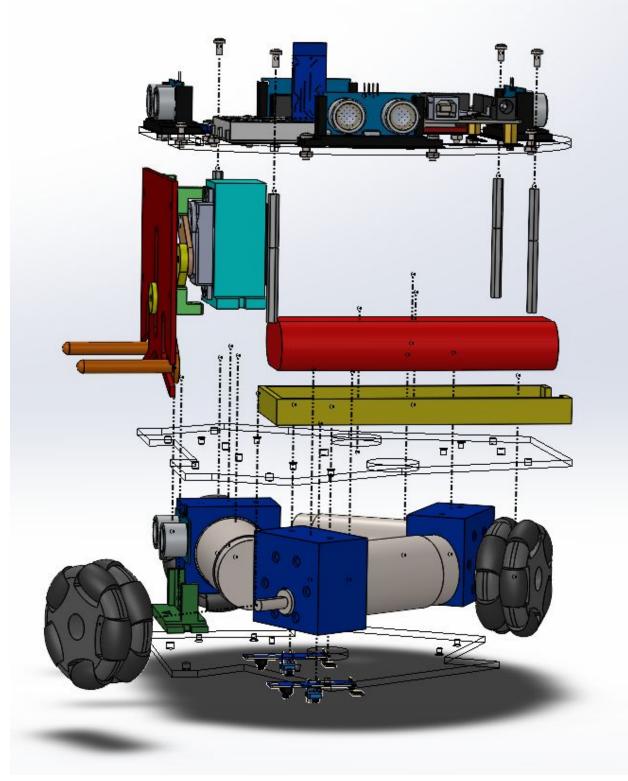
Exploded view of the rover demonstrating the layers. Most fasteners removed for clarity
